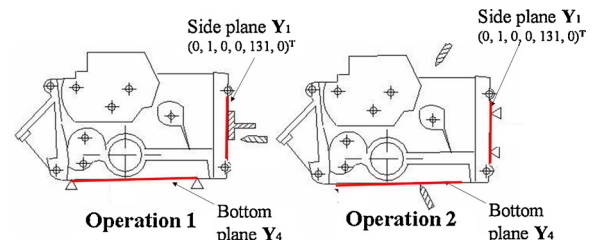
Machining and fixturing schemes for two operations (Side view) [23].
